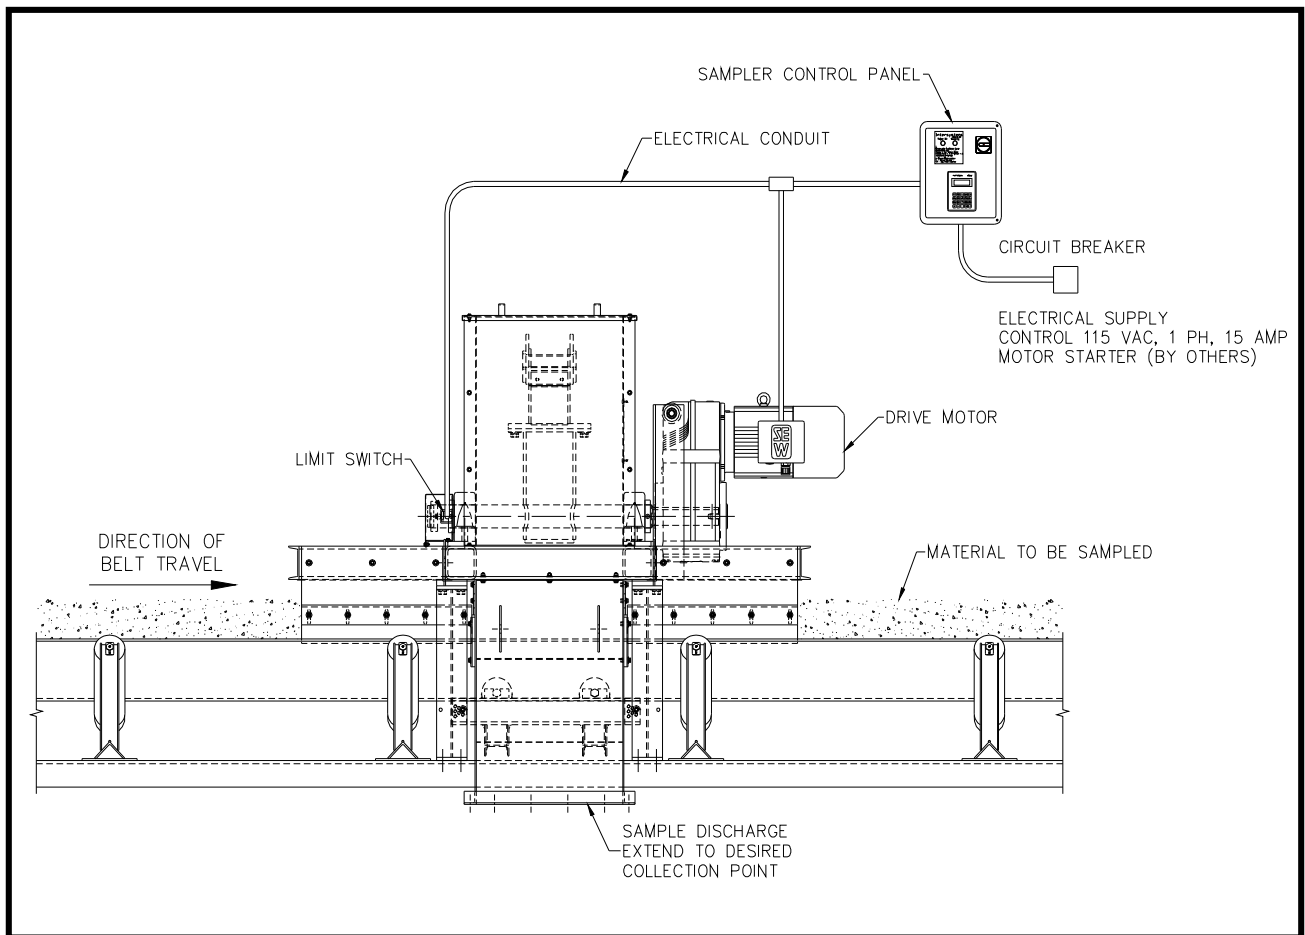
, TYPICAL INSTALLATION, MODEL RS SAMPLING SYSTEM
